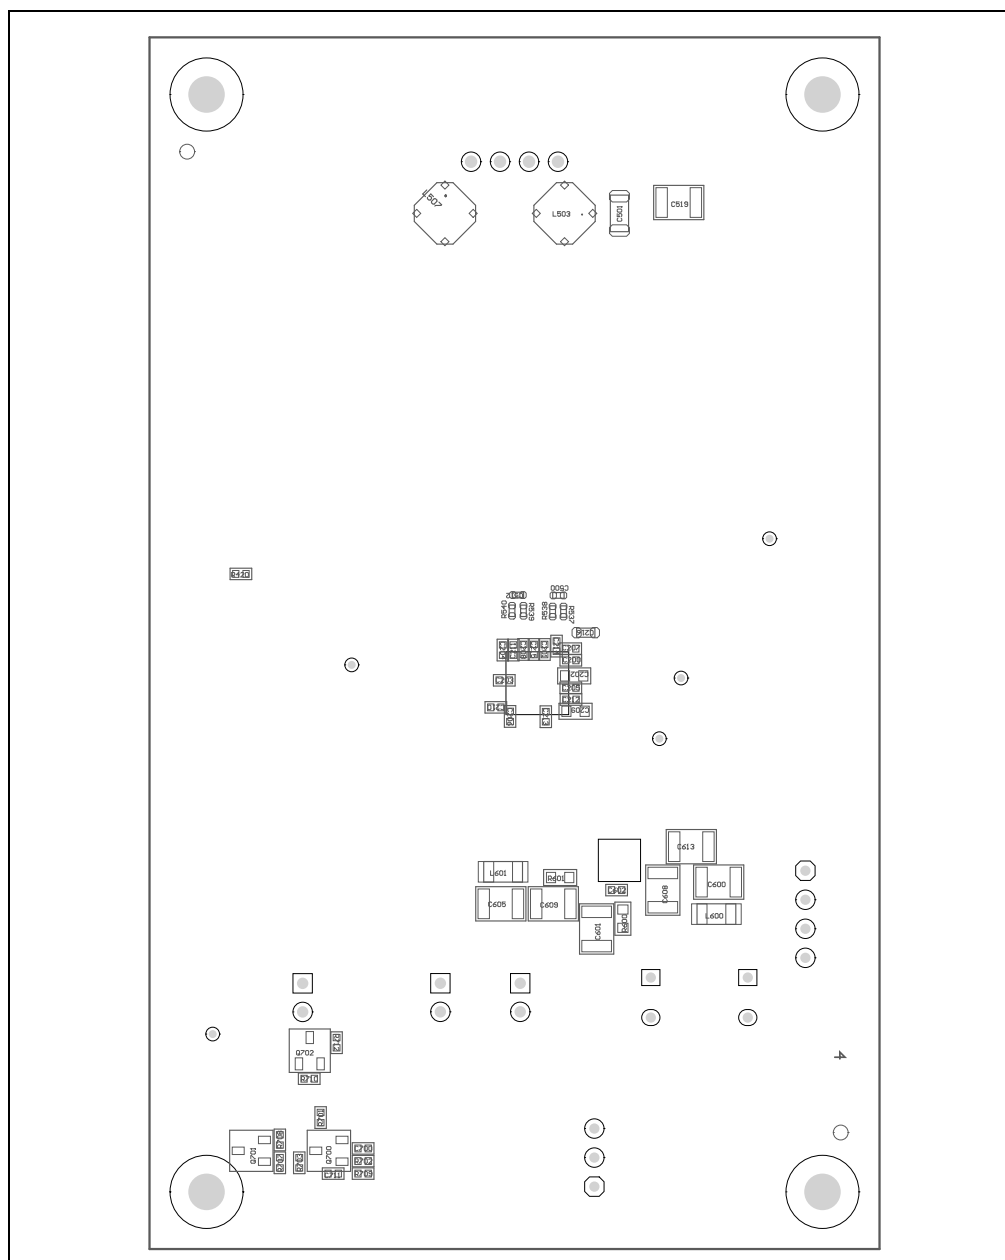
ASSEMBLY PLAN – TOP VIEW AND MECHANICAL DIMENSIONS
